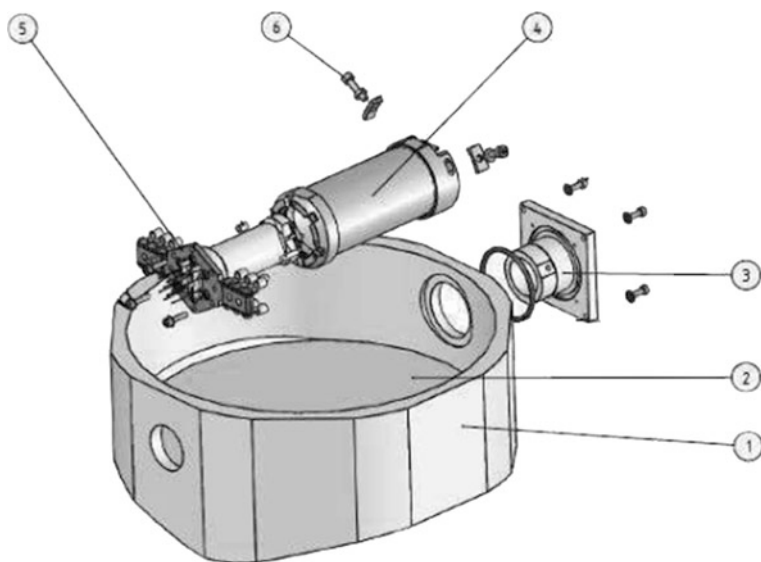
Exploded view of the cryostat system: (1) cryostat case (2) dewar cold plate (3) flange bolted on the cryostat case and optical window holder (4) external sample holder (5) internal sample holder with aluminum thermal shield installed (6) system for fixing the external sample holder to the window. Reprinted with permission [2]
